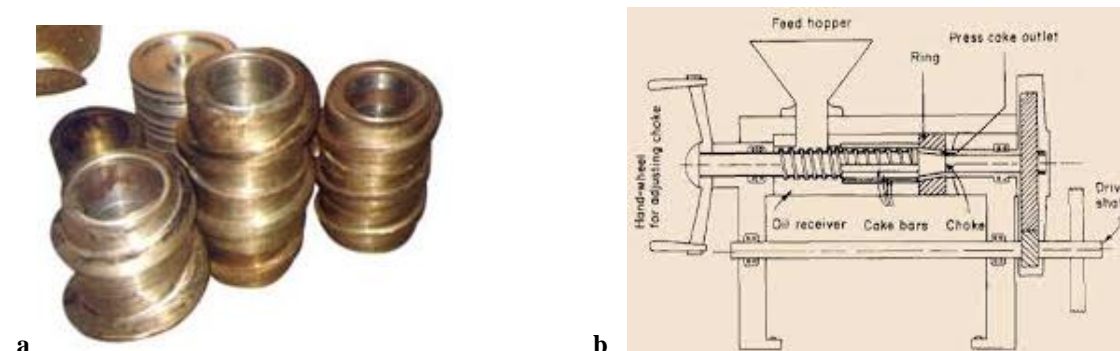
oil expeller worm machine (a) worm shaft (b) expeller machine
